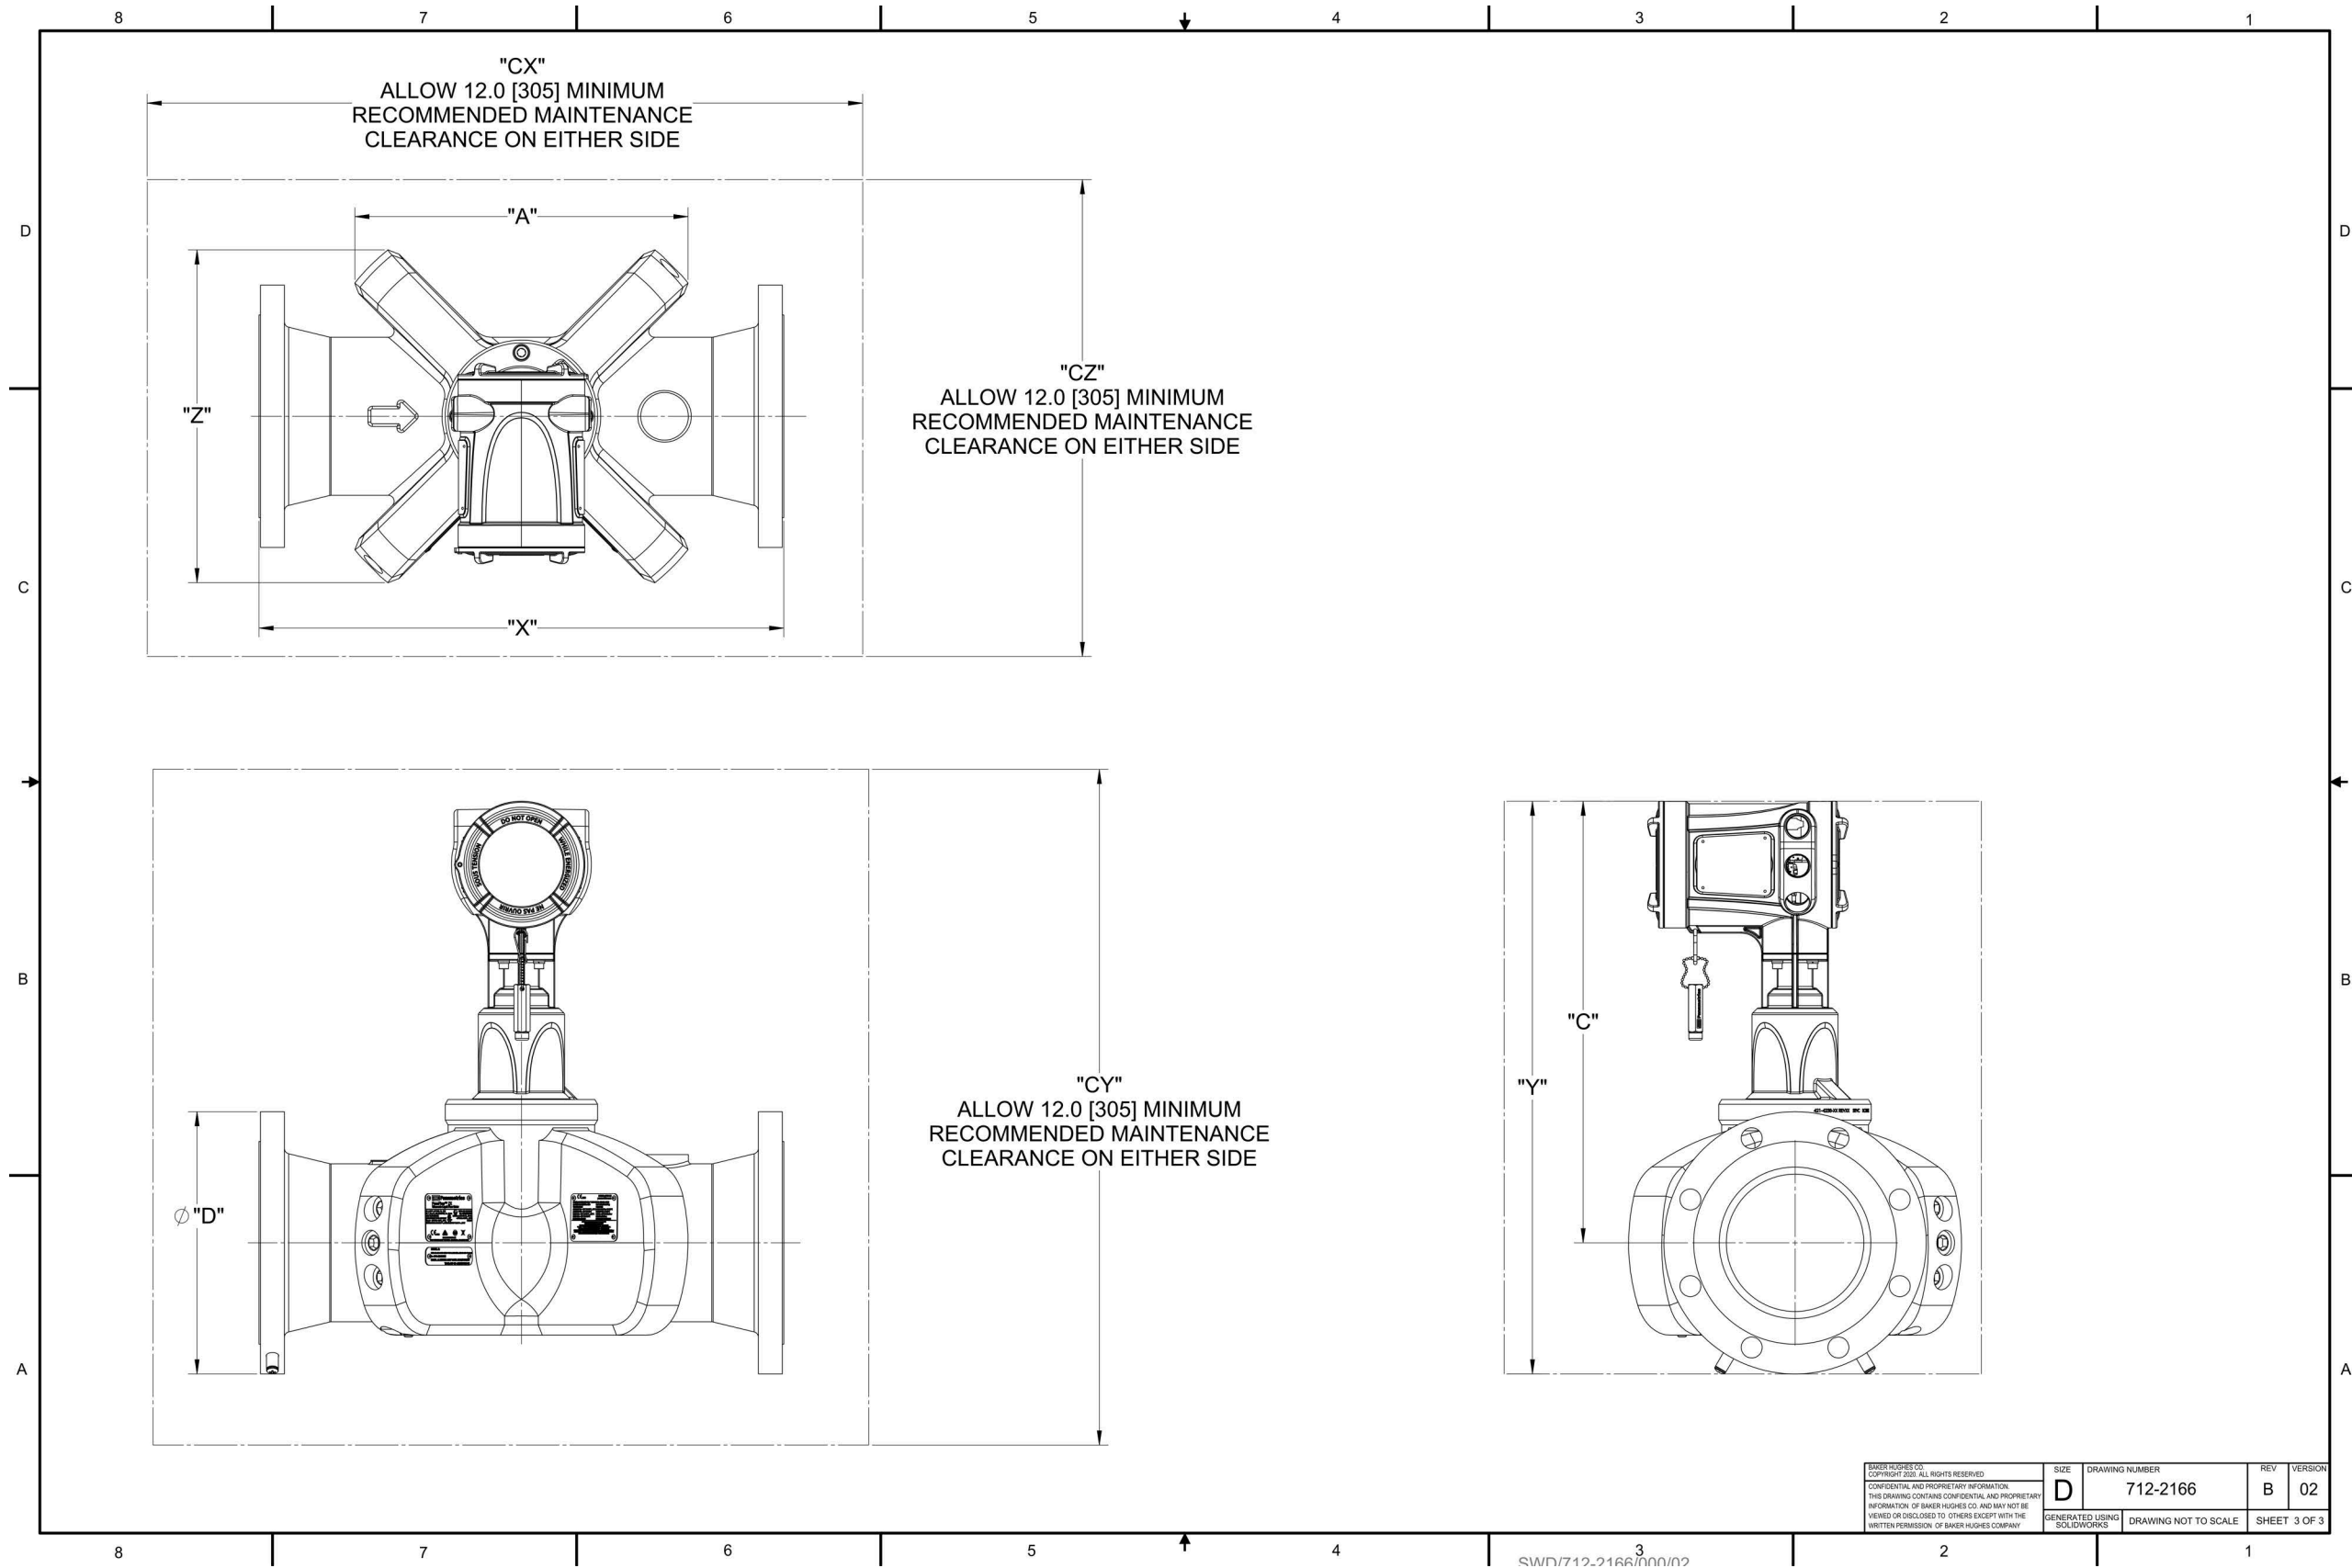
Outline and installation drawing - local mount (712-2166, sheet 3)
